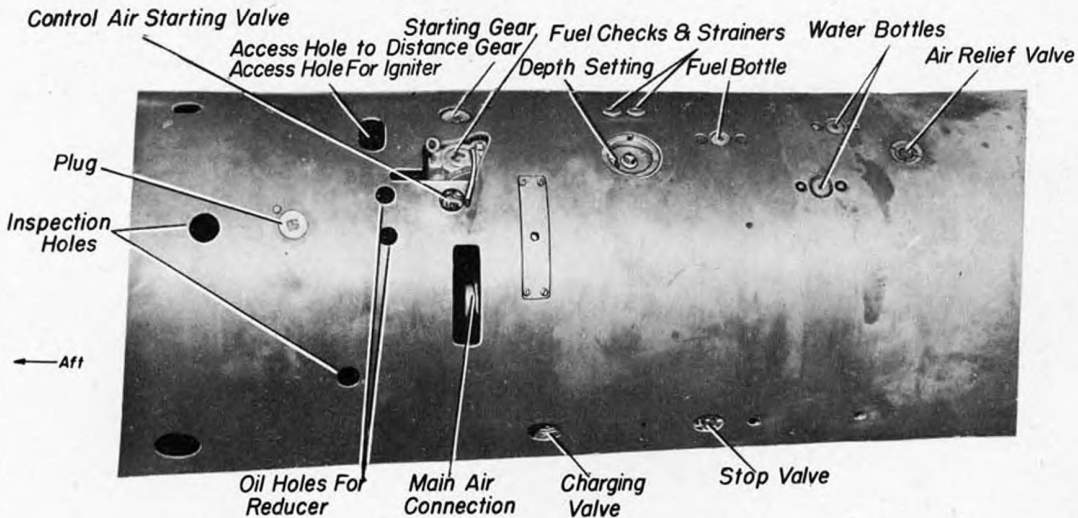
Torpedo Type 2 (Special), Flask Section, Top Starboard View
